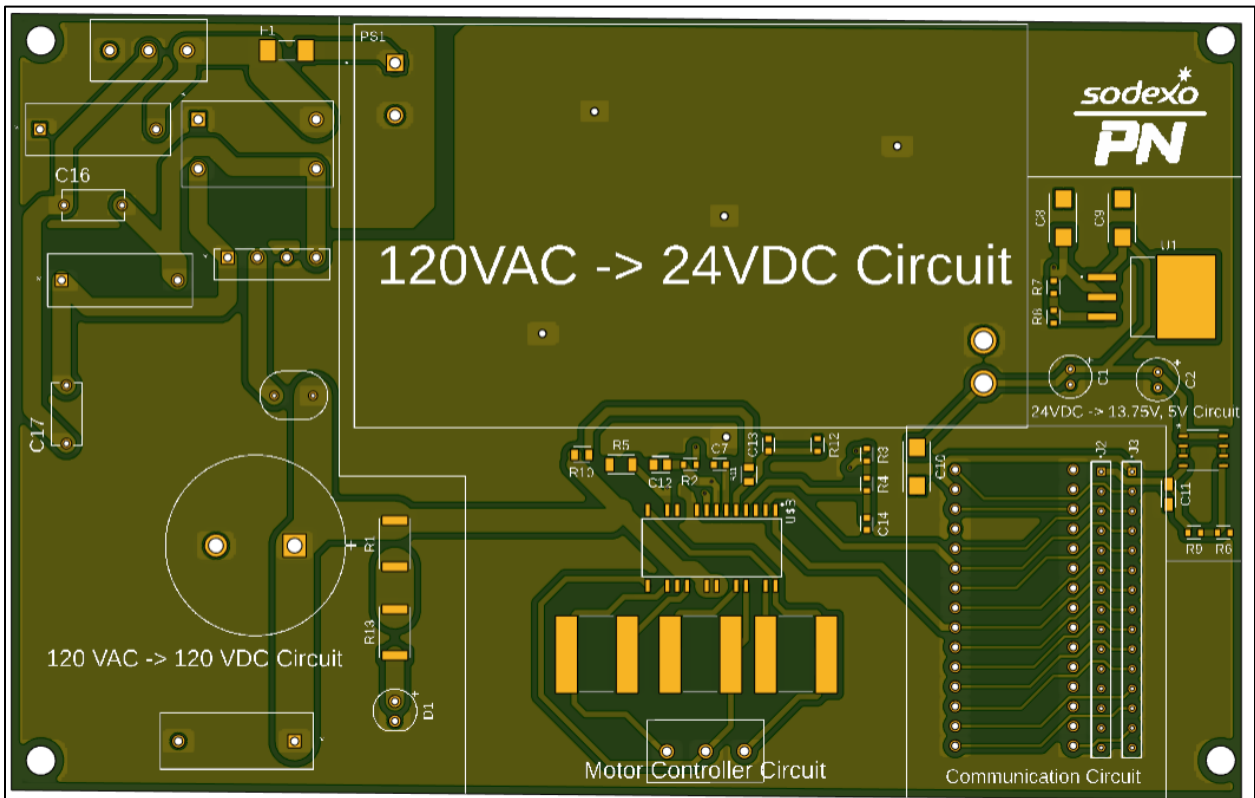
3D PCB of Conveyor Electrical System Top View Without Components
